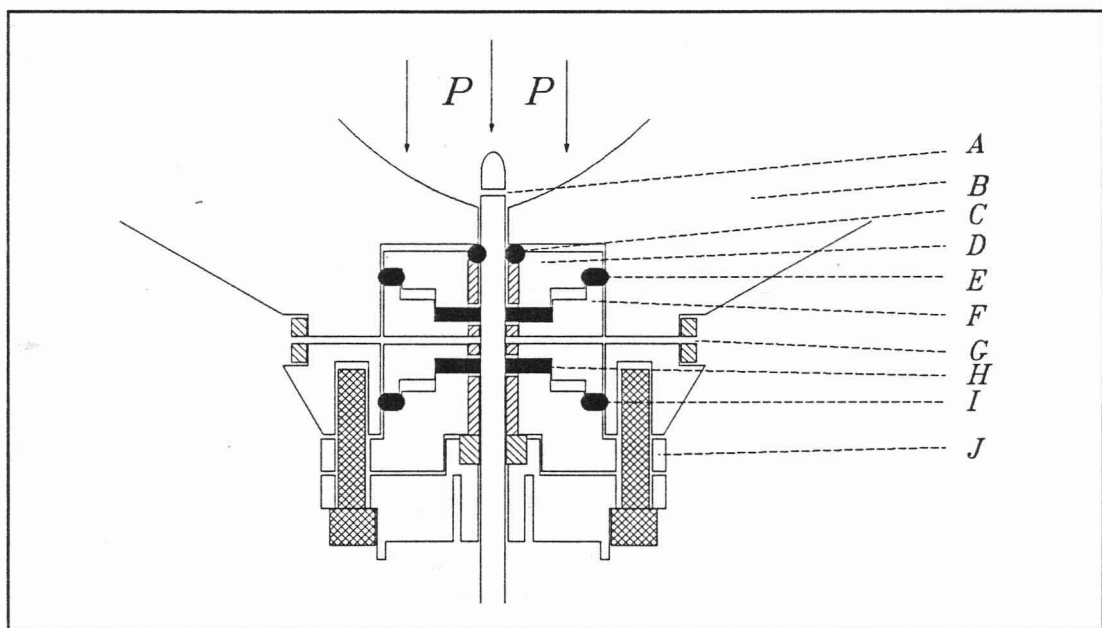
Exploded View of Liquid Sampling Device
